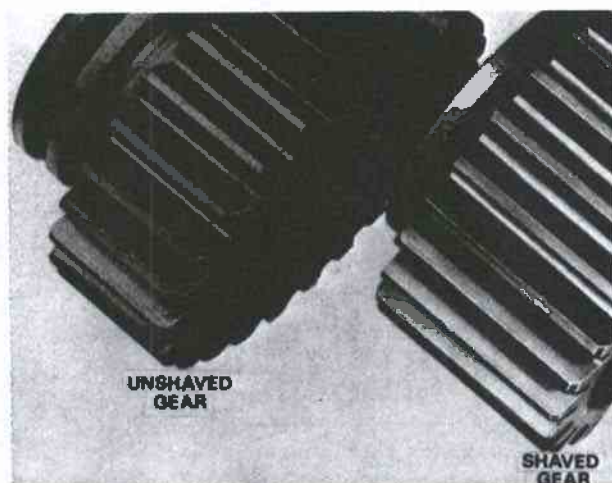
Views showing differences between unshaved and shaved gears.
